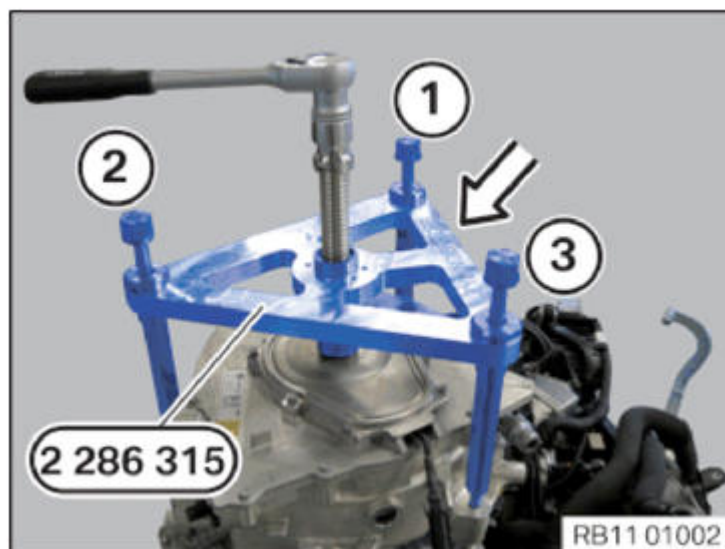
Installing Sealing Sleeve And Clamping Ring Into Alternator
